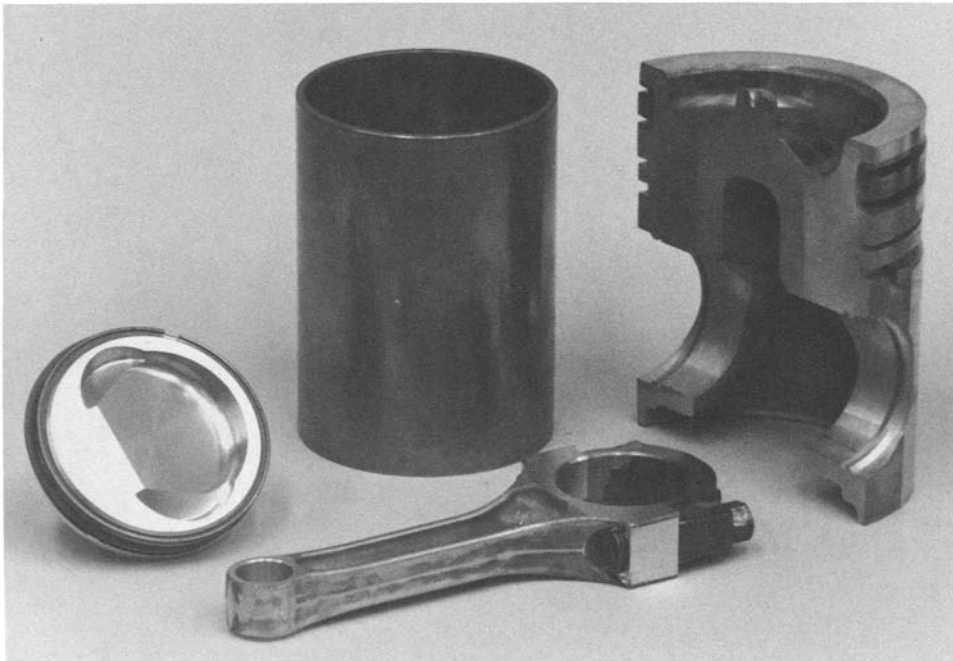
Automotive components fabricated from MMCs. Clockwise from left: experimental piston for a gasoline engine, experimental cylinder liner, production piston for a heavy-duty diesel truck engine, and experimental connecting rod. Courtesy of Ford Motor Company
